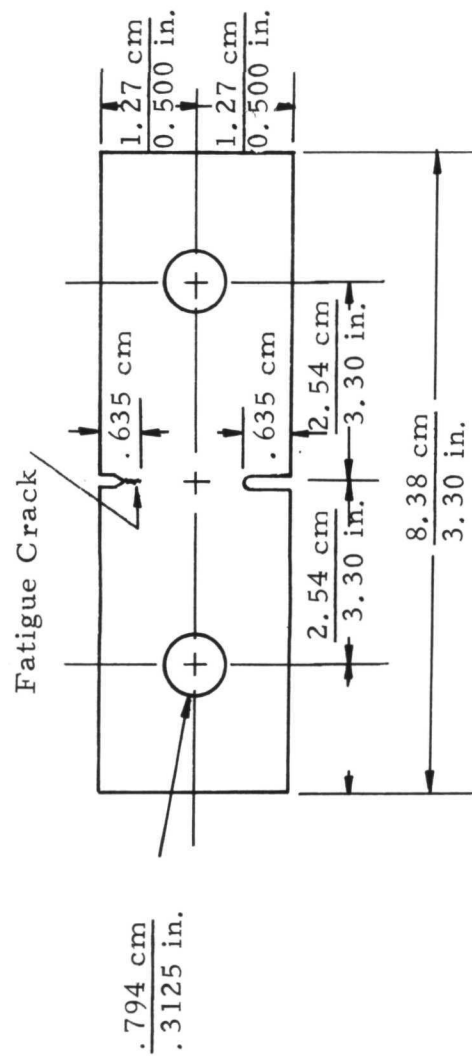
Sharp Notch Specimen After Precracking and Final Machining
